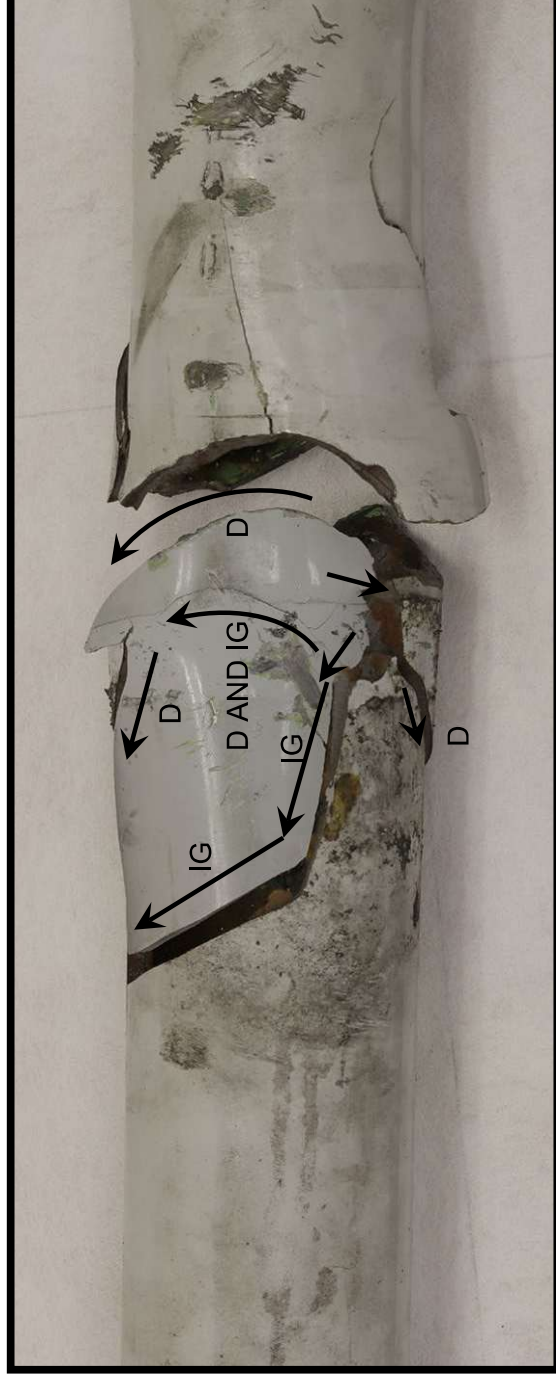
Detailed view of Upper Drag Strut Fractures (AFT Side). D= Ductile Separation, IG=Intergranular separation.
